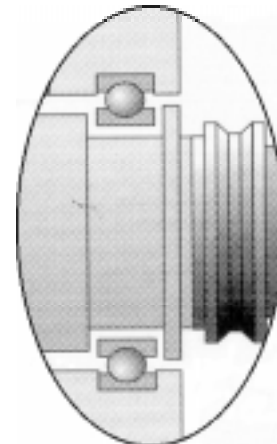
Radial and axial gaps between the spindle shaft and the safety bearings.
